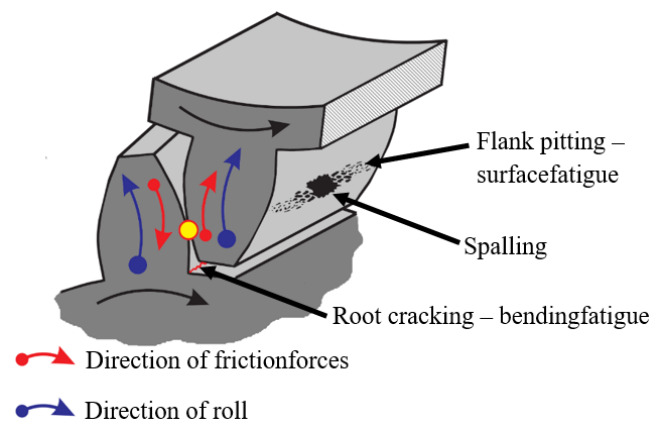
Mechanics of gear tooth engagement (at point of first contact)
